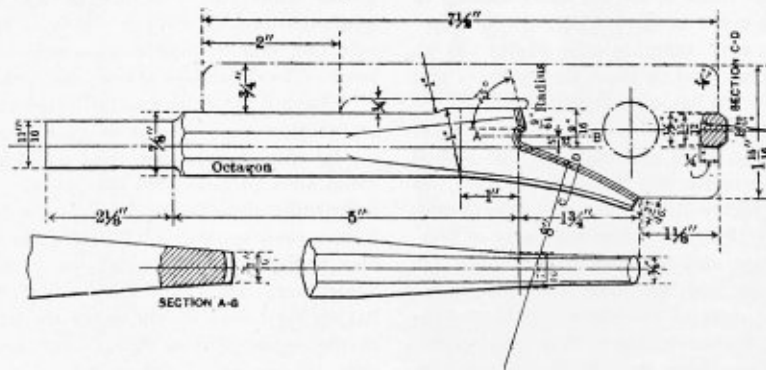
DETAILS OF A STANDARD BEADING TOOL
